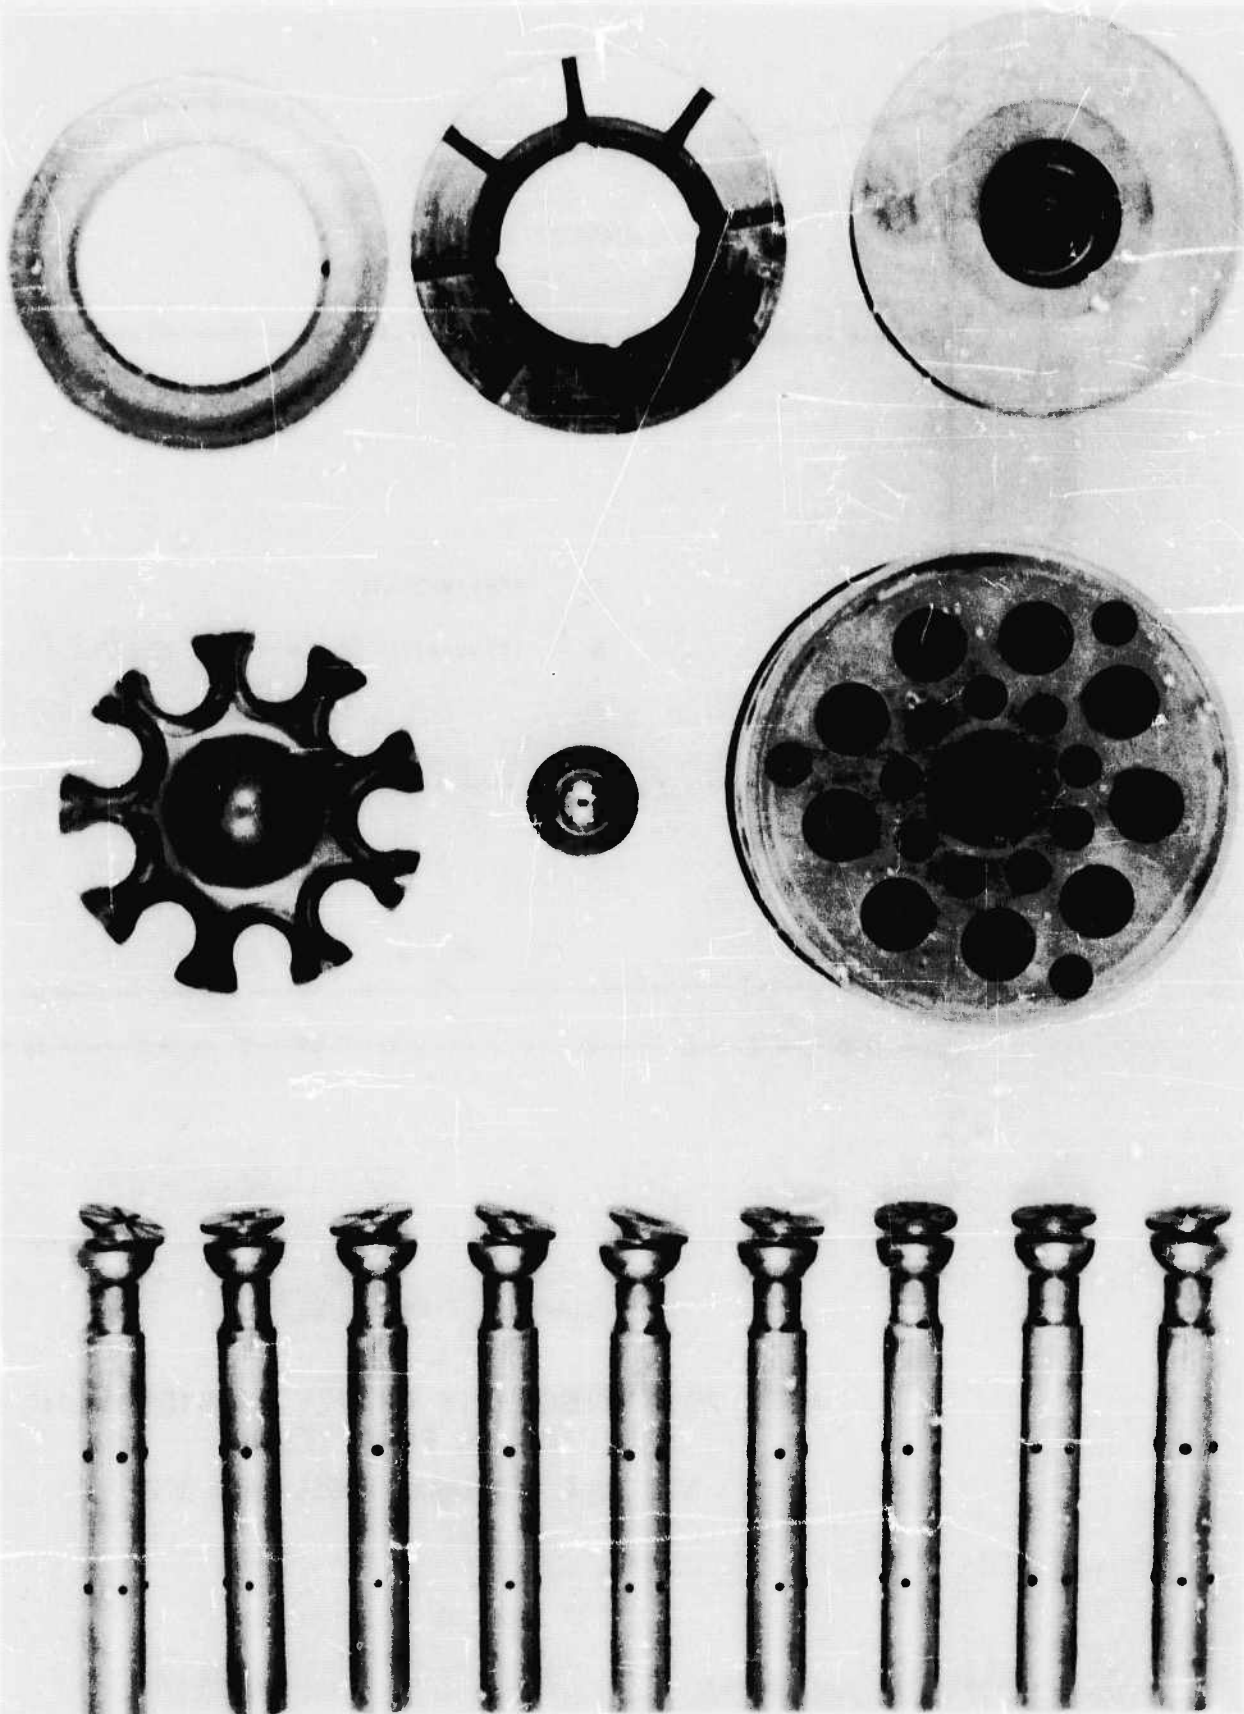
PUMP PARTS AFTER TEST NY-12
